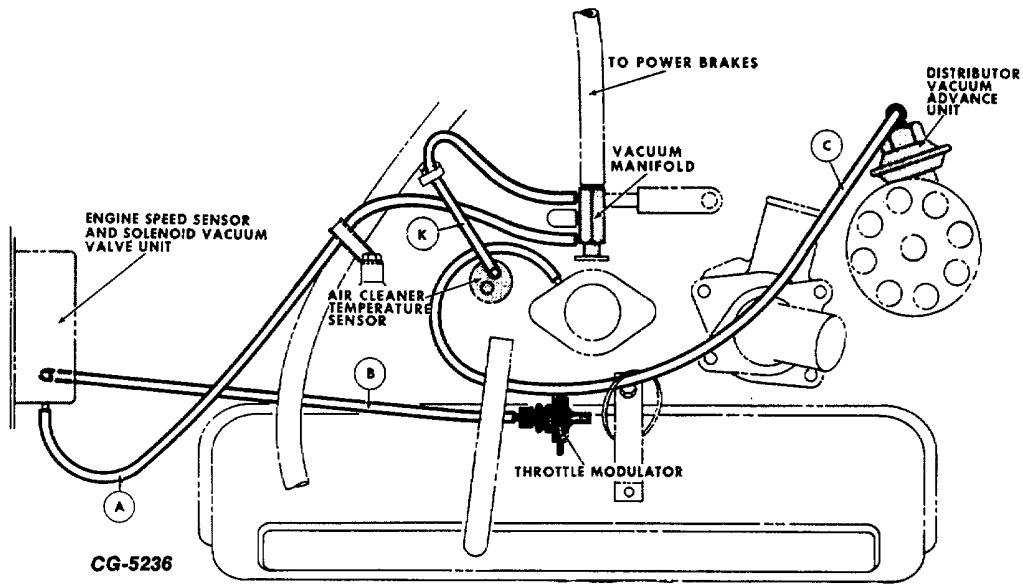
Vacuum Hose Locations on 4196 Engine With 1940C Carburetor in Scout Vehicles (Sold in Canada)
